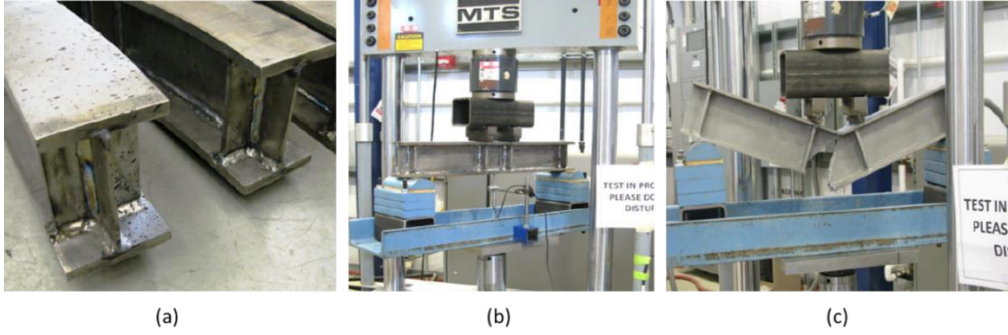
Component configuration and fatigue testing conditions for welded titanium beams [13-14]: (a) as-welded I beam; (b) I-beam specimen mounted on fatigue test machine; (c) after final failure
